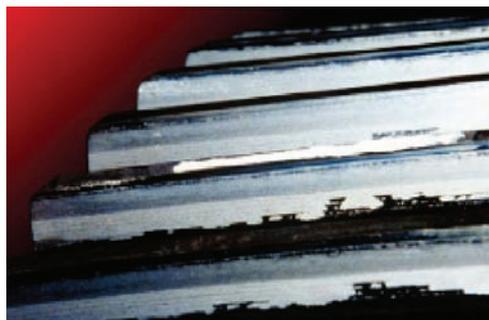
Wind turbine gears that have been subjected to micropitting. (Copyright © 2000, GEARTECH.)
